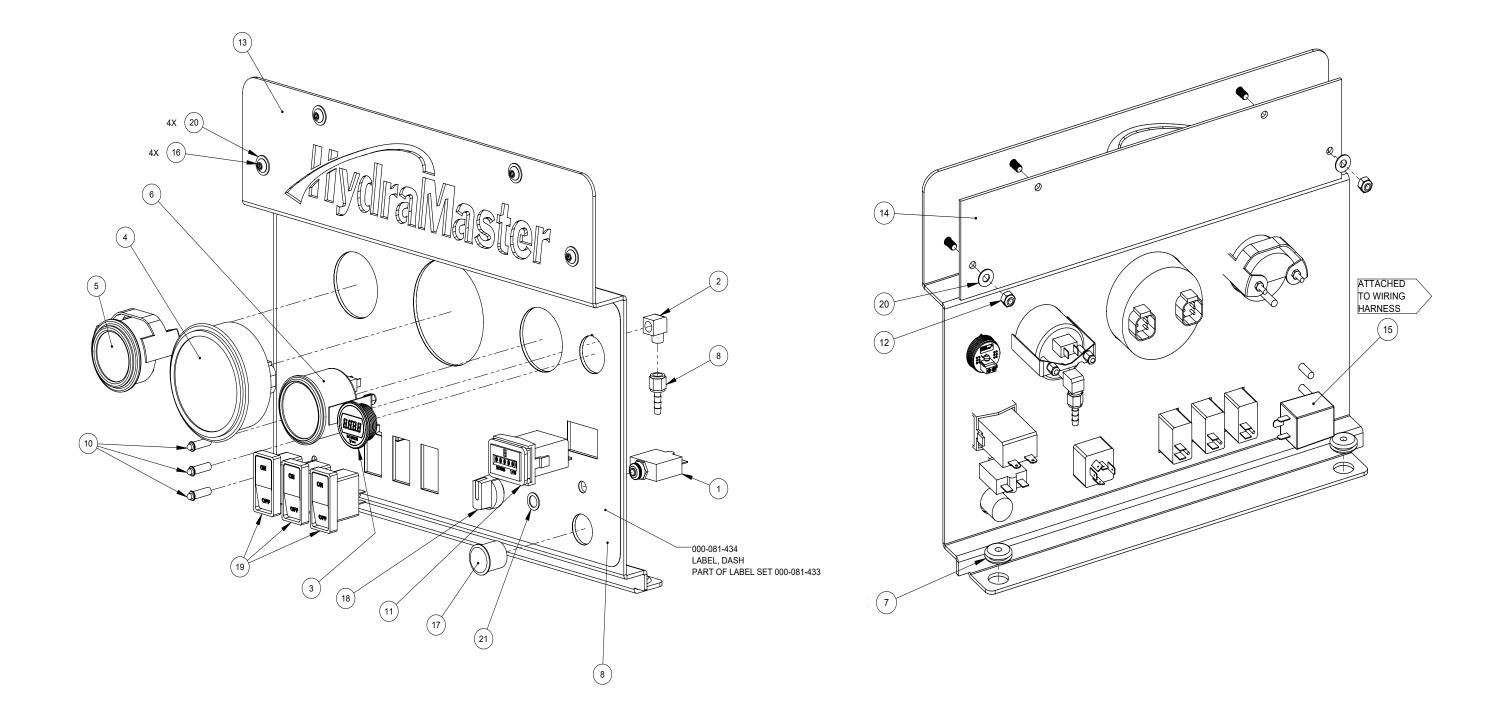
Assembly, Dash Panel - CDS xDrive 601-020-705 Rev. H
